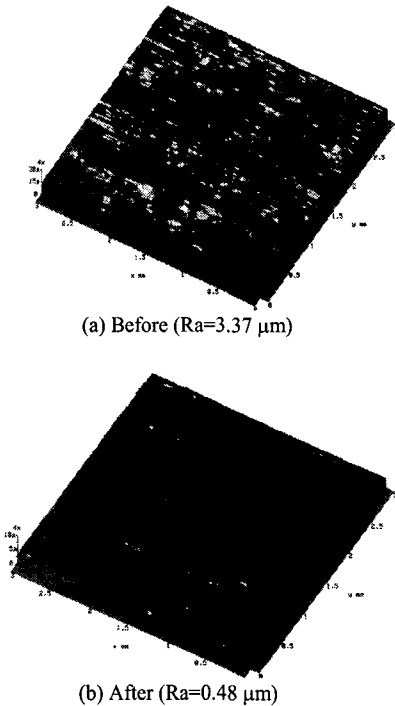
3D representation of the tooth flank before and after single tooth ironing
